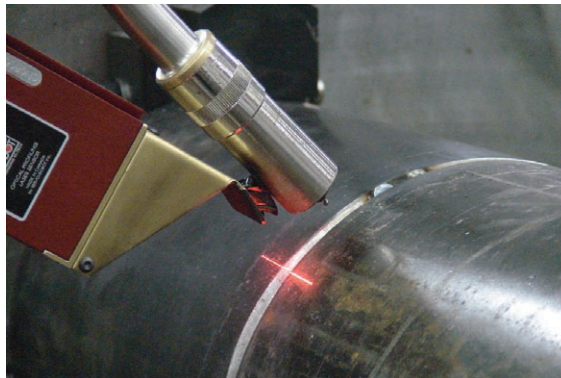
Laser vision systems are used for joint tracking, adaptive control, verification of part fit-up prior to welding, and real-time weld inspection.
